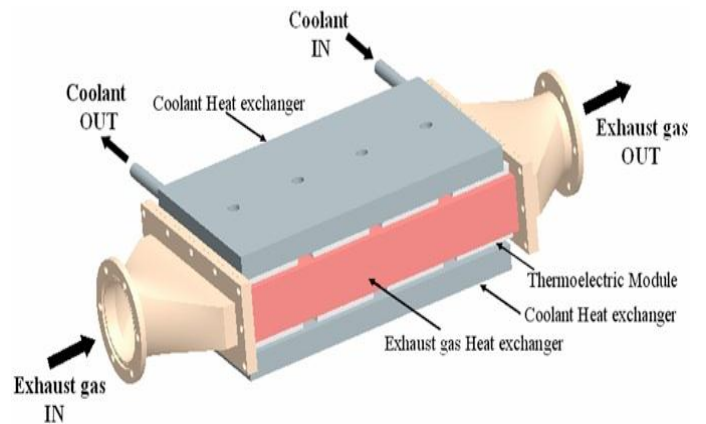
CAD Model of Heat Exchanger equipped with TEG module
